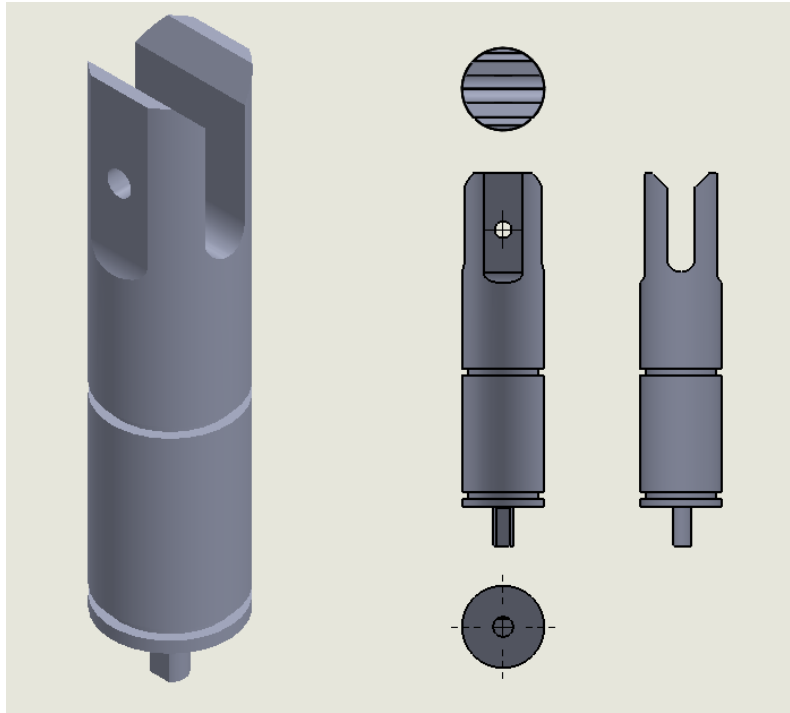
SolidWorks CAD drawing of the motor shaft-Wiper connection. Left: isometric view. Right: connection front, top, back, and lateral view.
